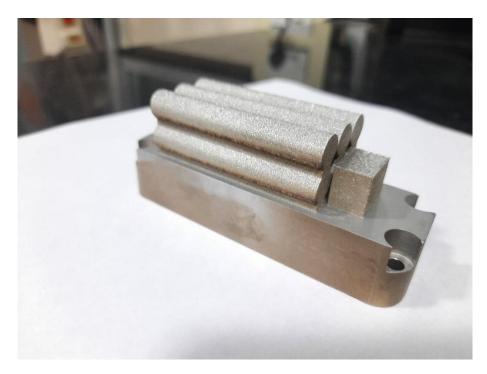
(b)- Horizontally built tensile test coupons, along with a 7mm x 10mm x 15mm
